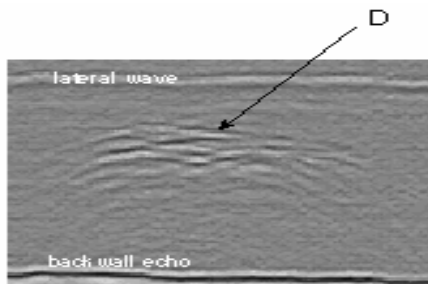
TOFD D-scan of butt weld and defect
